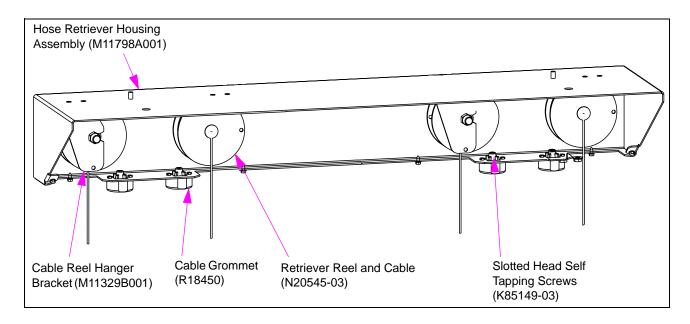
Retriever Reel, Bracket, and Cable Assembly
